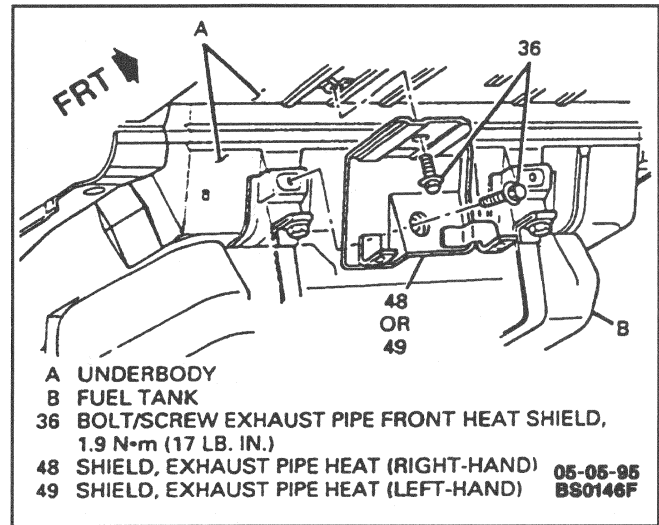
Exhaust Pipe Heat Shield (Wagon) (Right Hand Shown, Left Hand, Reversed)
